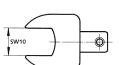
SW10 fork wrench insert for mounting and torque wrench Type 1300A123
